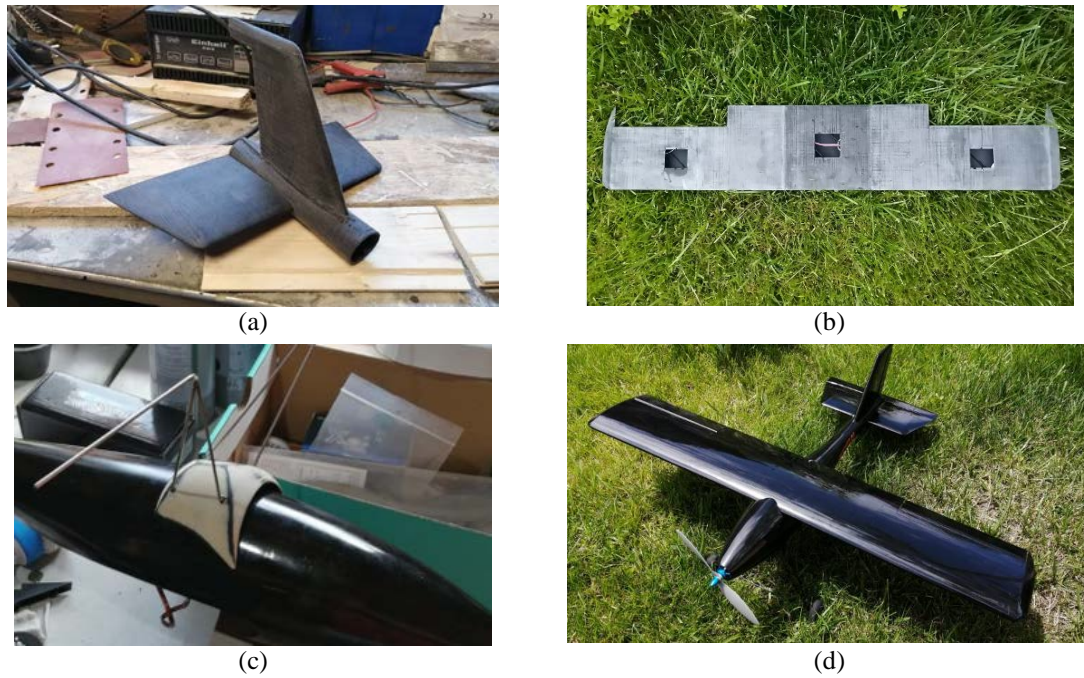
Stages in the assembly process: (a) gluing the rear subassembly, (b) assembling and gluing the wing, (c) manufacturing the landing gear, (d) the 3D printed radio-controlled aircraft.
